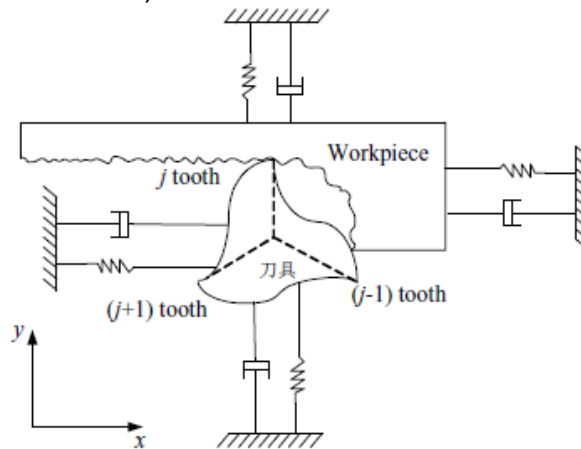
The milling dynamic model considering both tool and workpiece stiffness [142]
